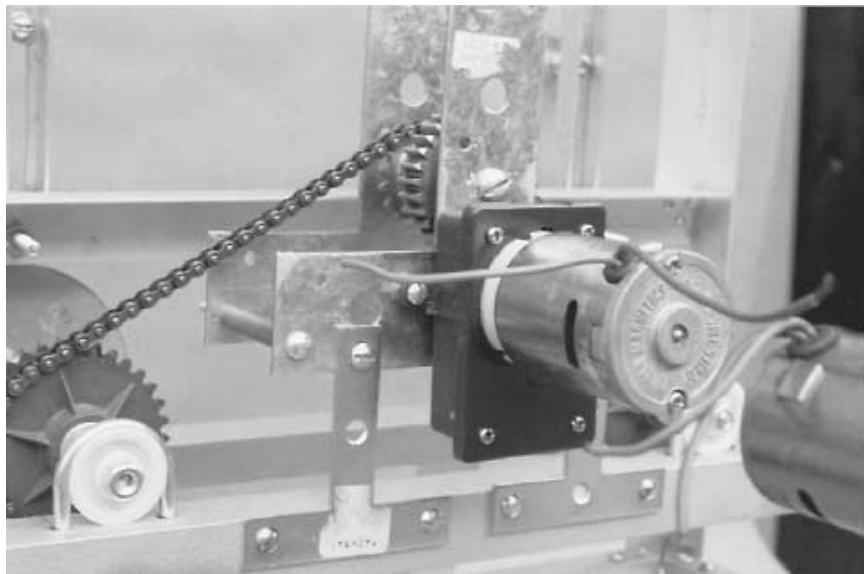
One of the drive motors mounted on the robot using smaller galvanized mending Ts.
